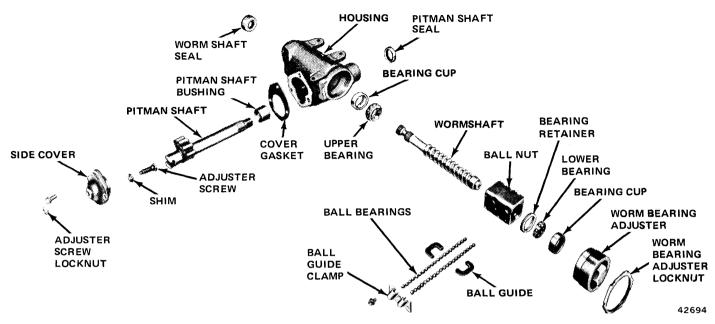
Steering Gear-Left-Hand Drive Vehicles
